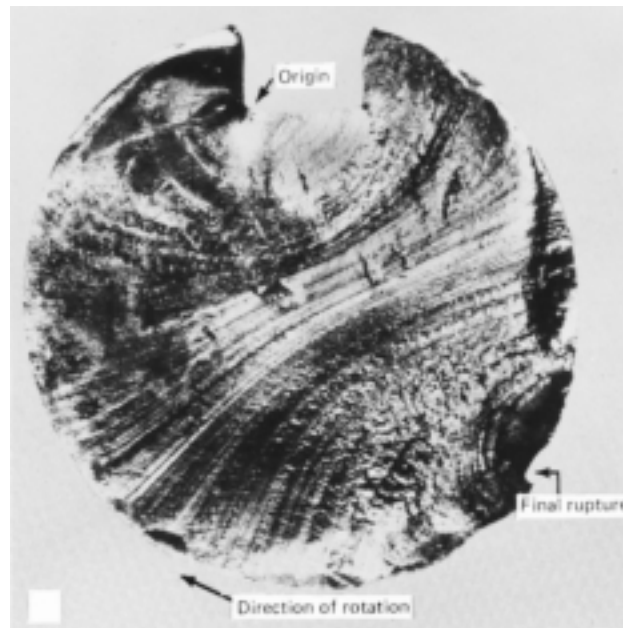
Fracture surface of a rotating steel shaft that experienced fatigue failure. Beachmark ridges are visible in the photograph. (Reproduced with permission from D. J. Wulpi, *Understanding How Components Fail*, American Society for Metals, Materials Park, OH, 1985.)
